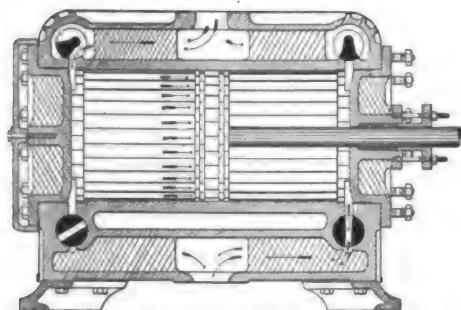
SECTIONAL VIEW OF CYLINDER AND STEAM CHEST.
